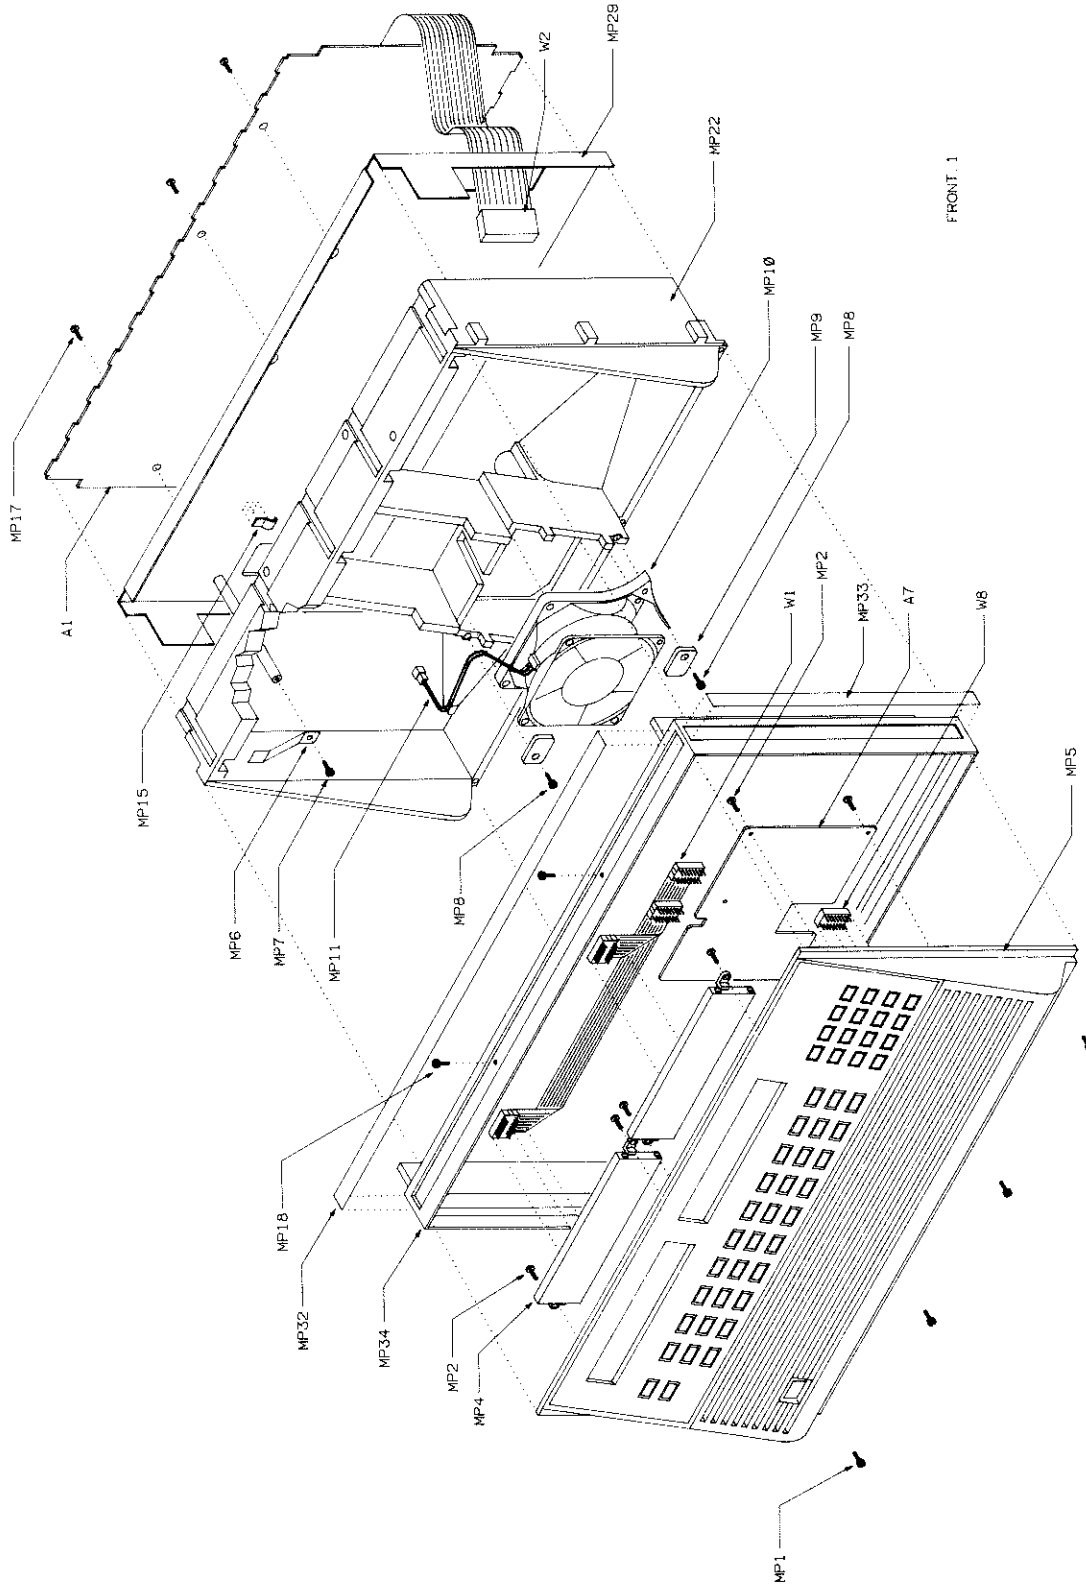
Mainframe/Extender Front Panel Exploded View
